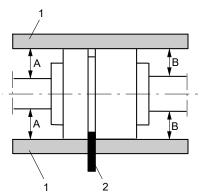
Non-spacer-type coupling, checking the coupling alignment
